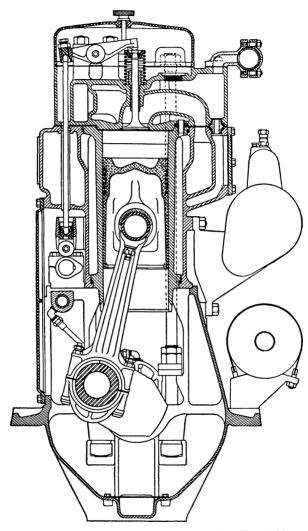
Cooper-Bessemer Diesel Engine, Type BN.
